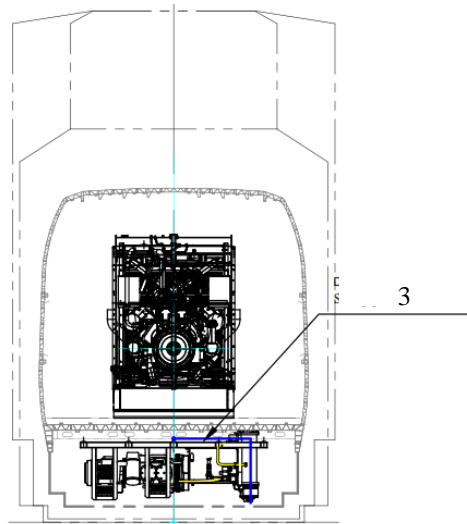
Fuel Piping Diagram on Motor Engine Combustion Engine (Back View)
